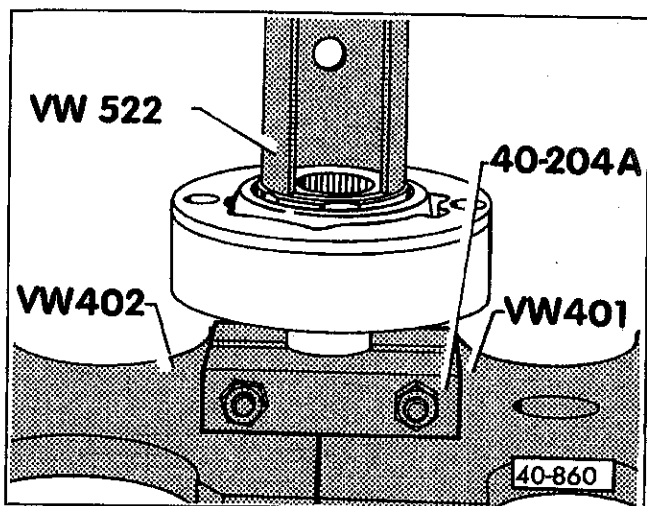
Inner CV joint being pressed onto drive axle. Numbers indicate Volkswagen special tools.
